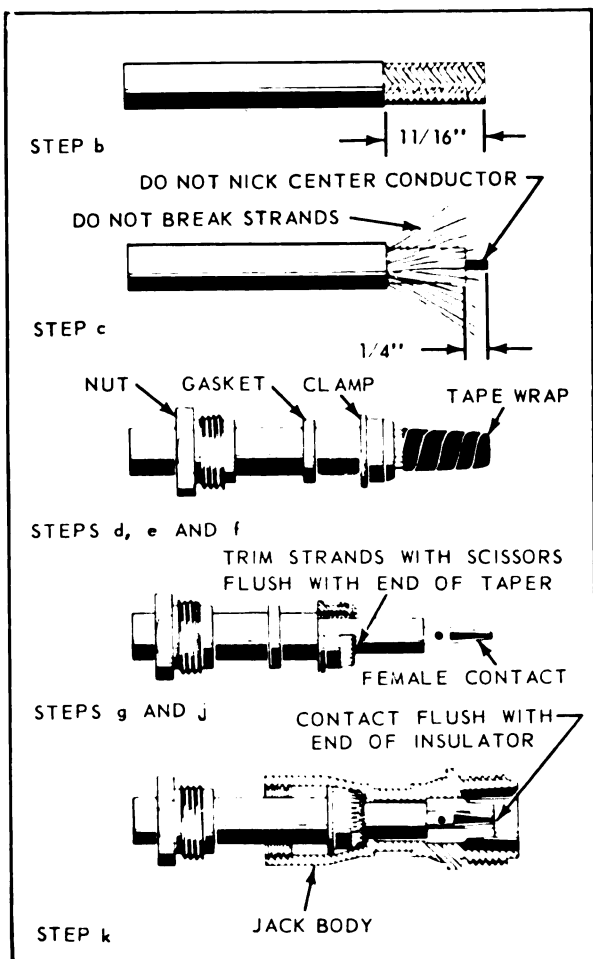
Attaching Improved HN Connectors to Coaxial Cable
